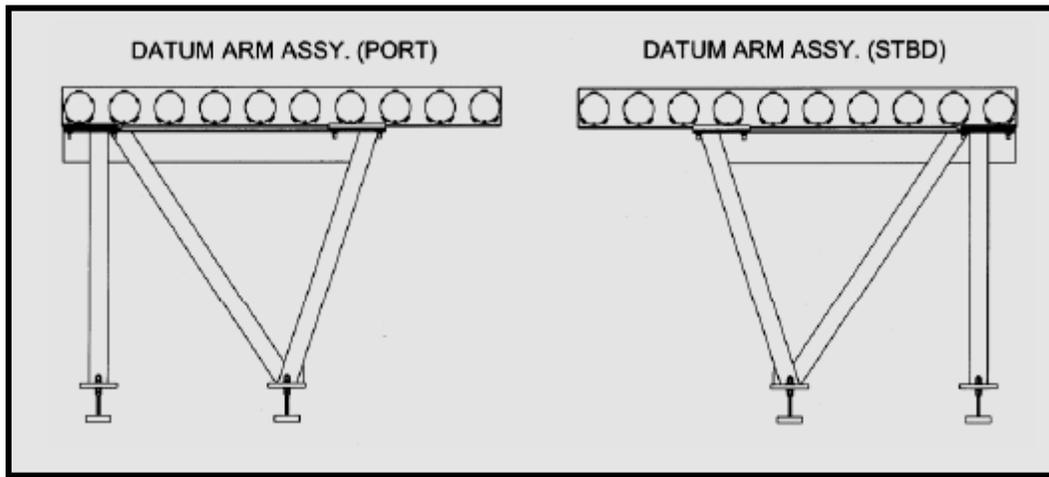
Port and Starboard Datum Assemblies.
